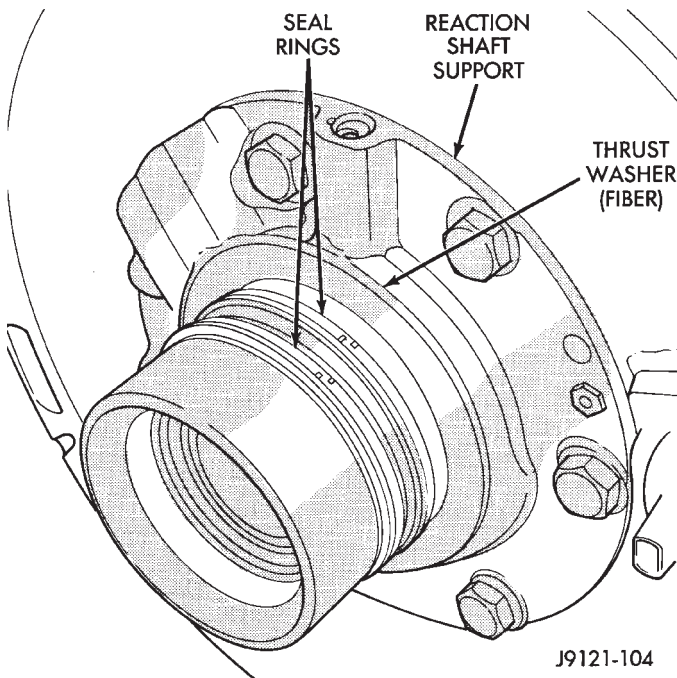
Reaction Shaft Seal Ring And Thrust Washer Installation
